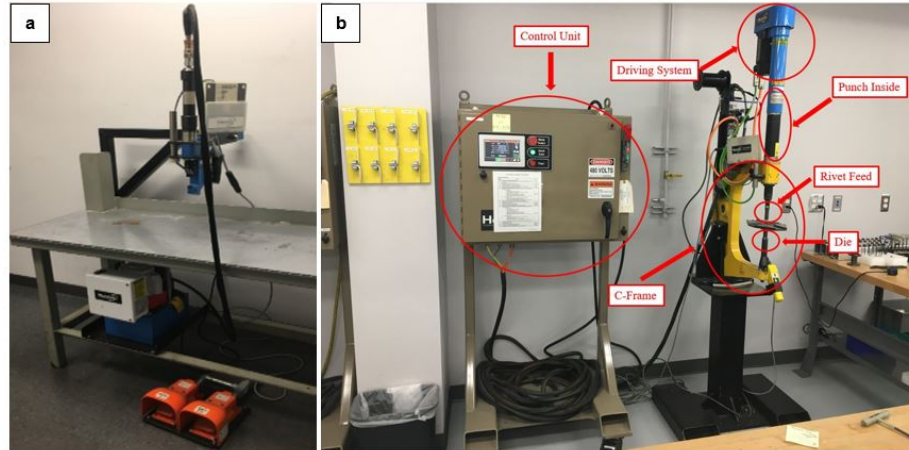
The SPR system at (a) Ryobi Die Casting (b) Henrob Corporation
